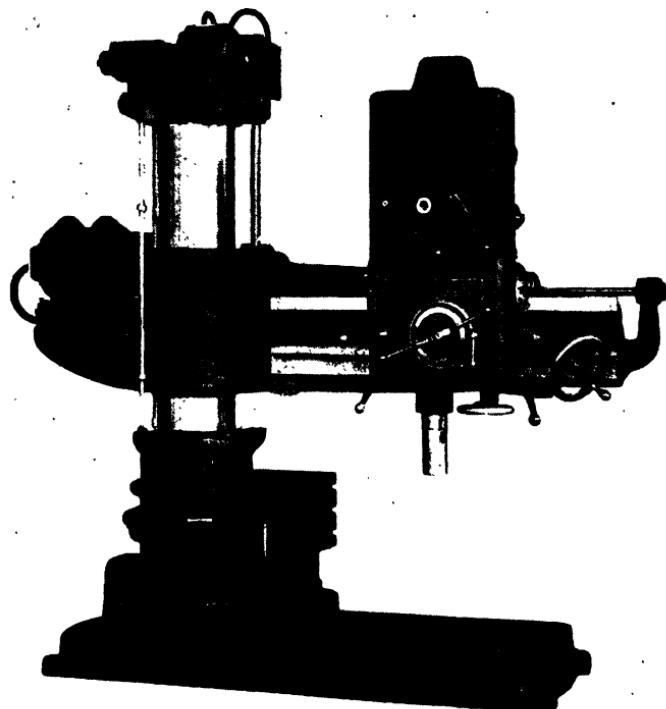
Individually driven, well-guarded, radial drill. (*Courtesy of The Cincinnati Bickford Tool Company.*)
